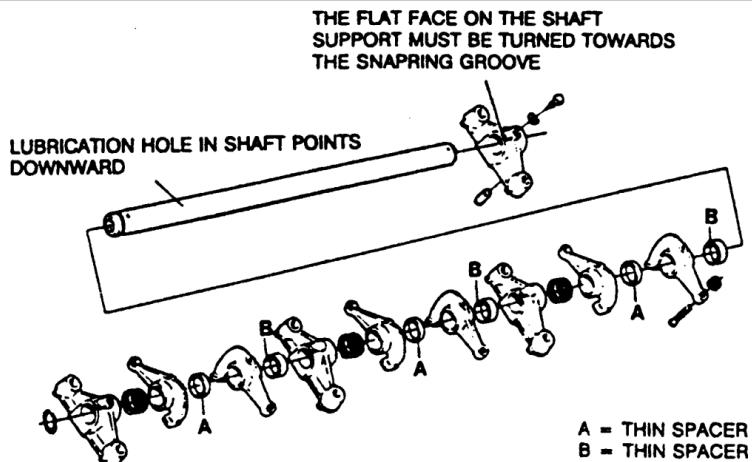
Rocker arm shaft assembly-2.8L 6-cylinder engine
